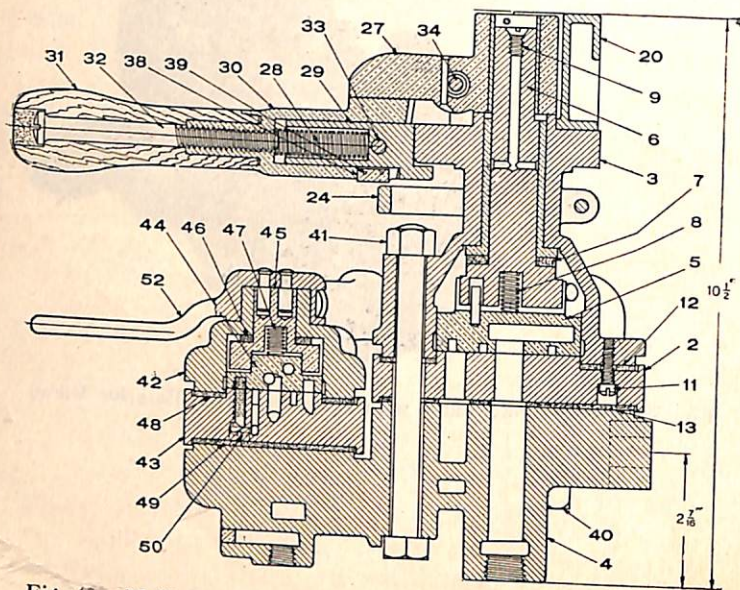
M-28 Brake Valve with Selector Valve, Sectional View
